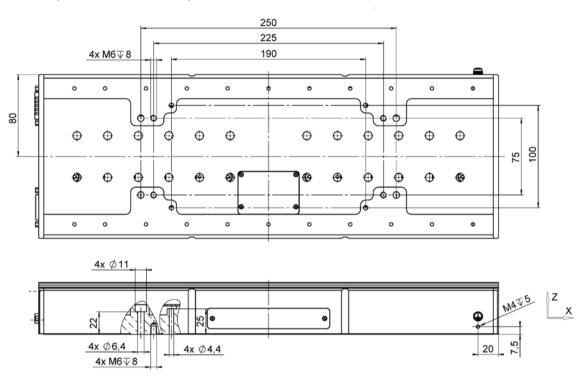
Dimensions of the V-551.7D: Bottom view and side view
